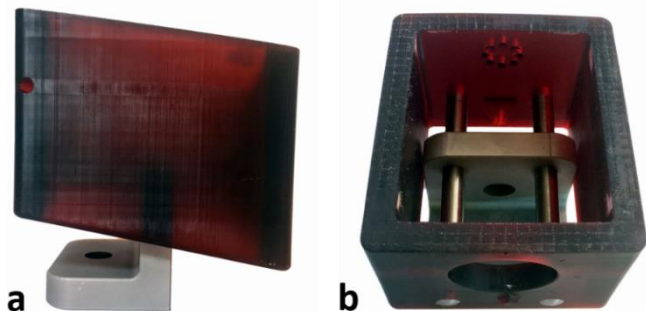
Initial design of the housing using steel shafts and brass inserts. a) Side view. b) Front/top view.
